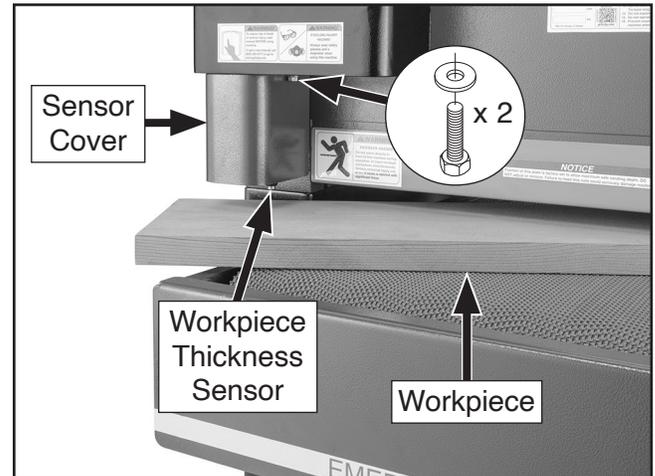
Workpiece under workpiece thickness sensor and sanding drum.
